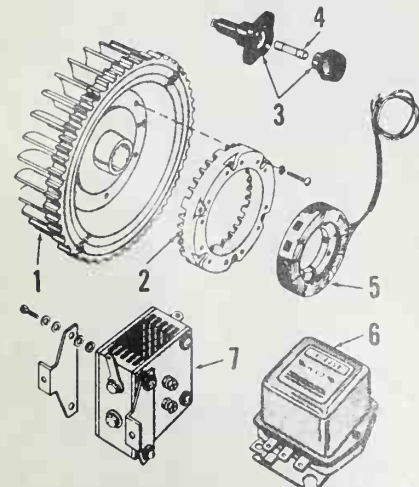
Typical flywheel alternator shown in exploded view. In some models, regulator (6) and rectifier (7) are combined in a single unit.
